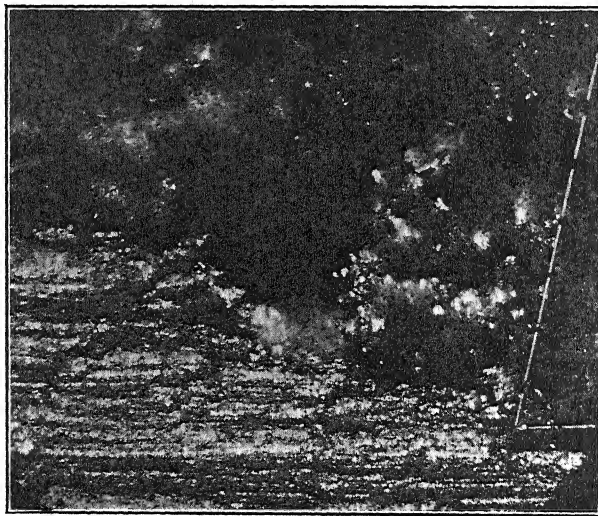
A 15-Deg. Front-Rake Angle Planer Tool Indicated at the Right Removing a Chip 0.020 In. in Depth from Cast Iron; the Brittle Nature of the Material Is Indicated. (55X)
